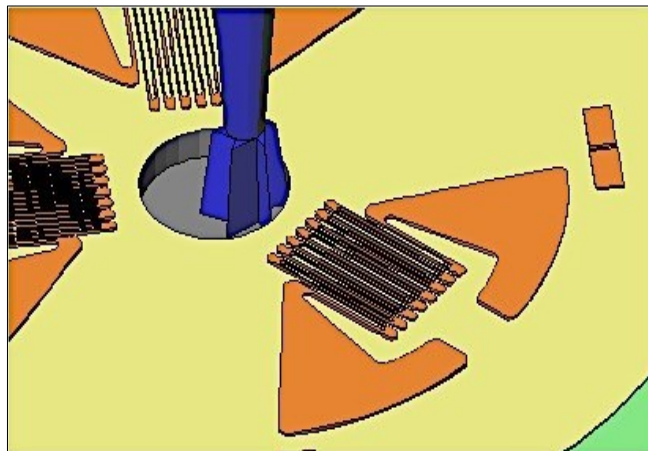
Process of carbide tipped cutter milling the hole [80].
